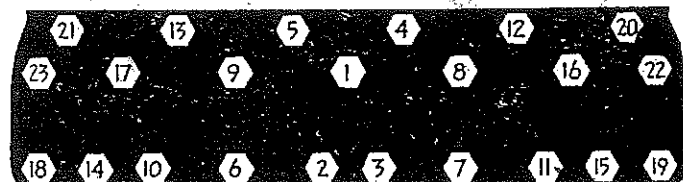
Head tightening chart for 361, 426, 451 and 477 engines
